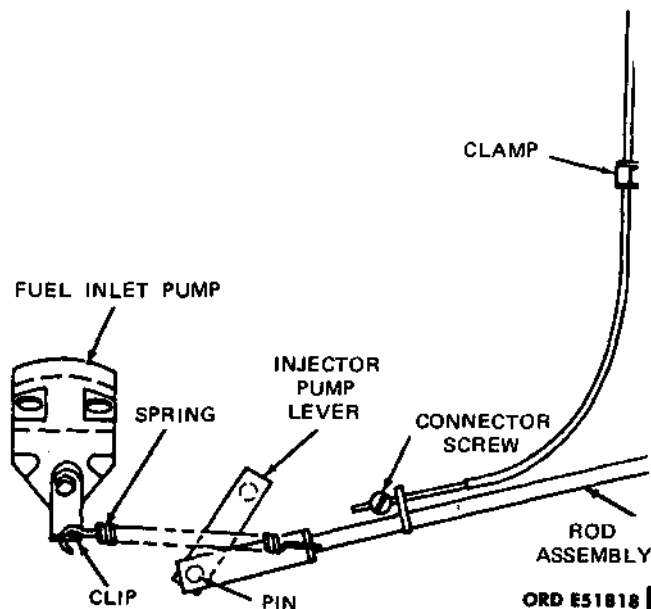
Accelerator and throttle linkage at injector pump - diesel and multifuel.
